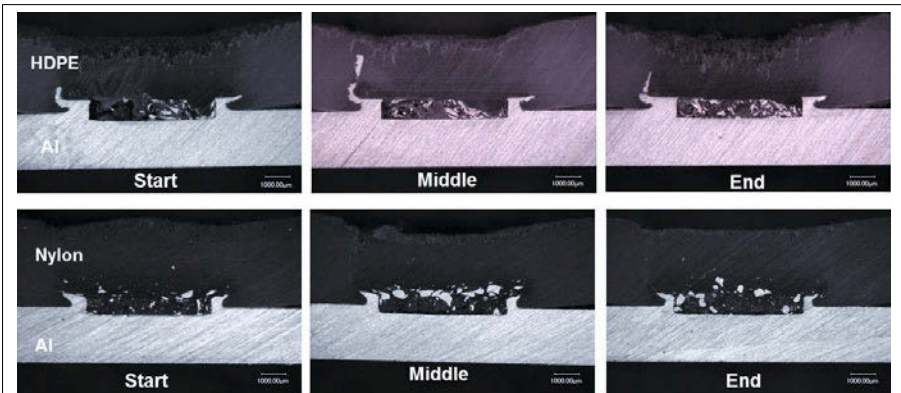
Transverse weld cross-section revealing the FSS joint between HDPE and aluminum (top) and Nylon 66 and aluminum (bottom). The cross-sections were obtained from near the start, middle and end of the each 250mm long joint
